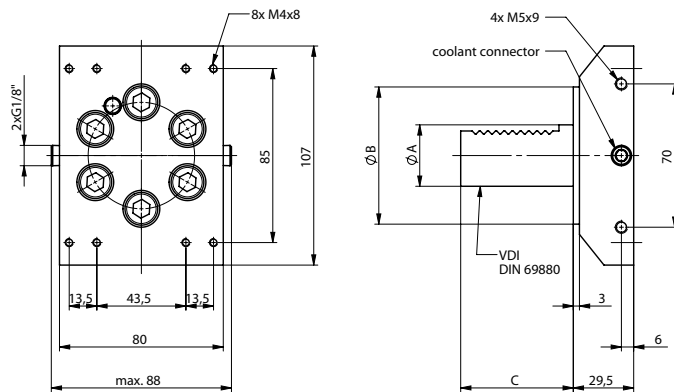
Machine adapter with straight shank for disk-type turret with VDI tool holding fixture, Type 9119AB...S
